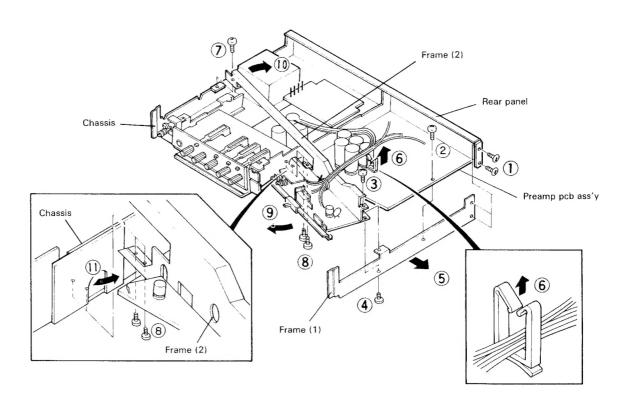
How to remove switch pcb ass'y (X13-2980-00) (1)
